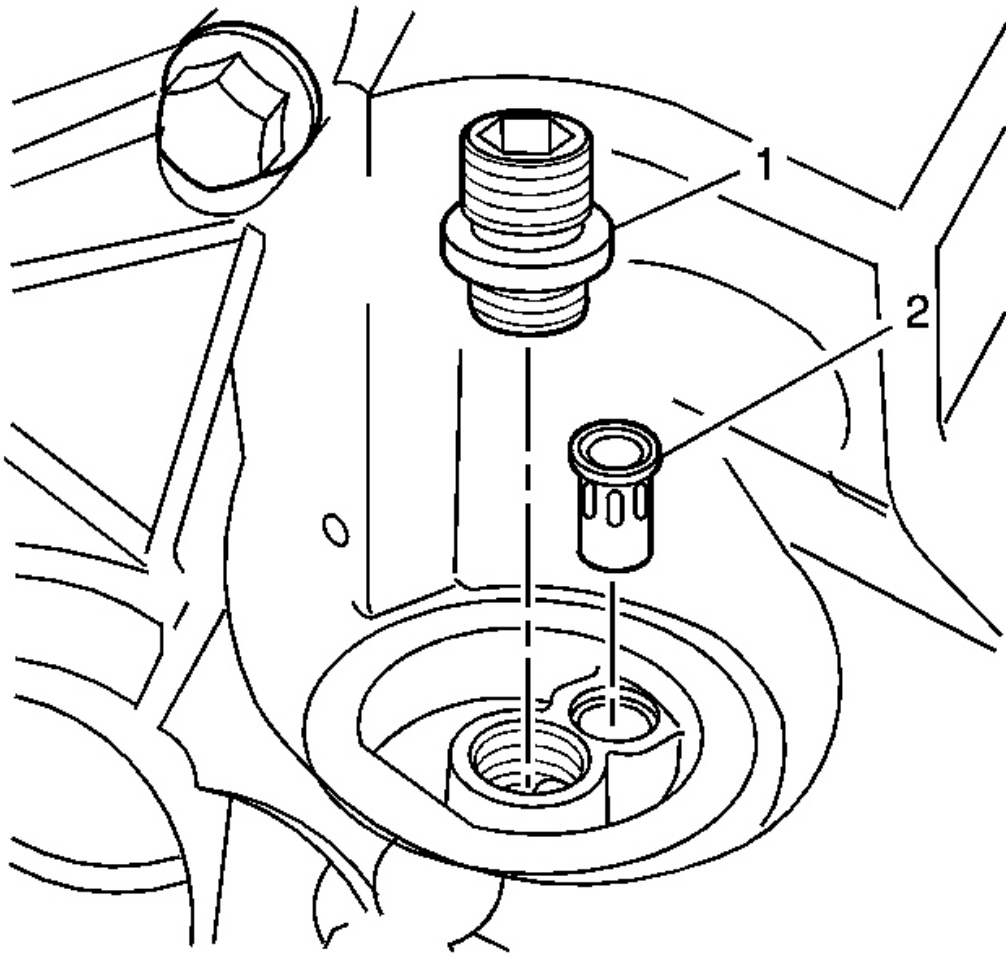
View Of Oil Filter Adapter & Bypass Valve
